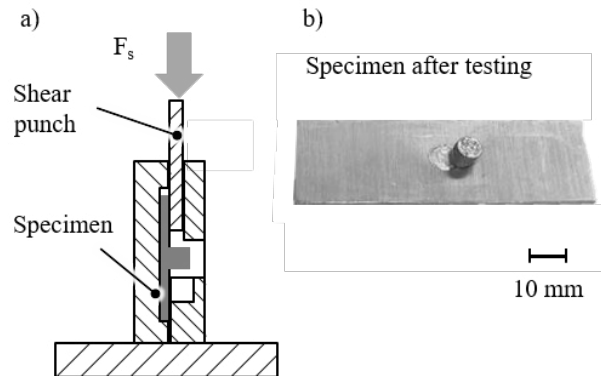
a) Schematic setup for shear test of hybrid part b) Exemplary specimen after testing.
